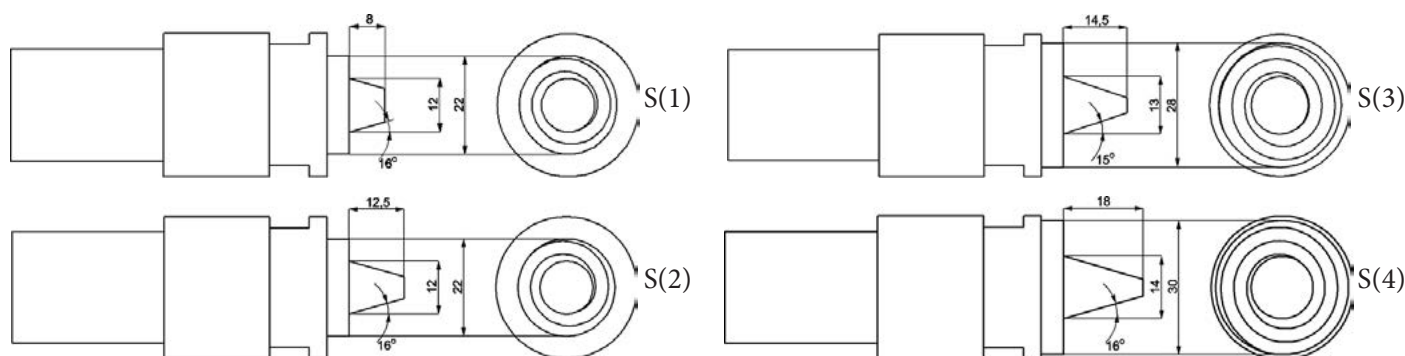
Tools and dimensions of working parts of the tools used in the tests
